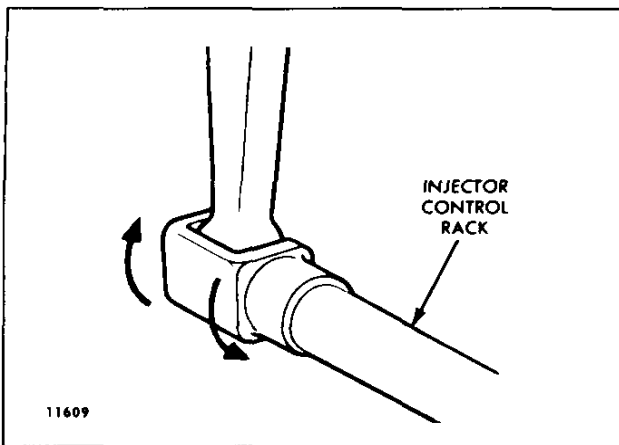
Checking Rotating Movement of Injector Control Rack
